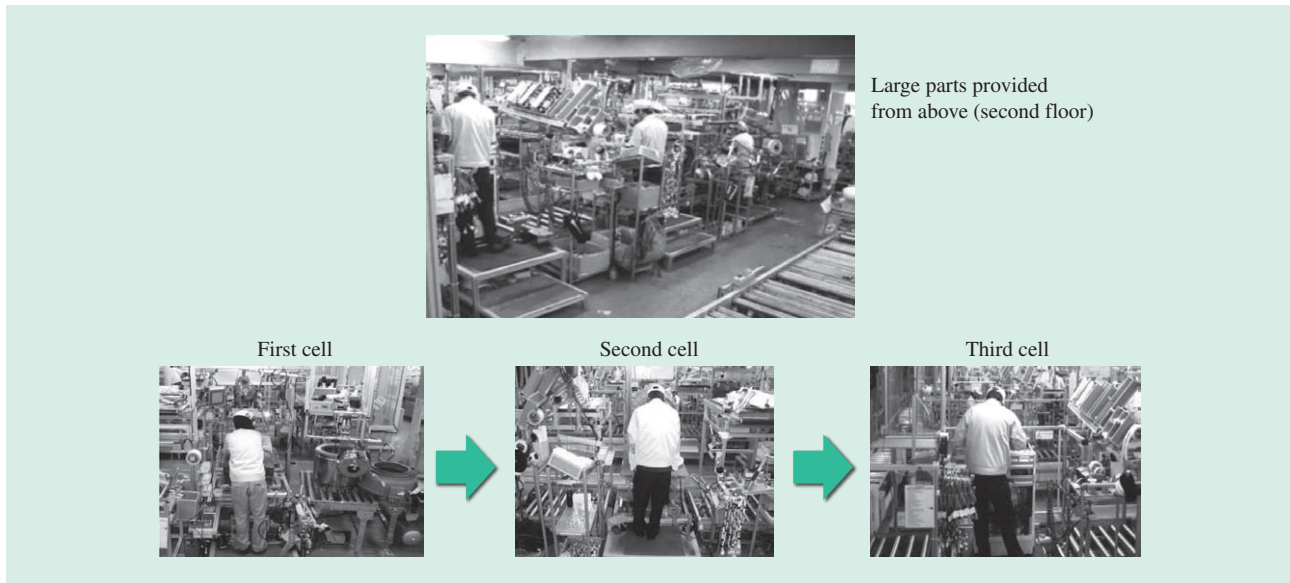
Front-loading Washer Dryer Assembly Cell.
